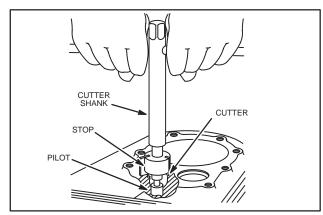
COUNTERBORING FOR VALVE SEAT
